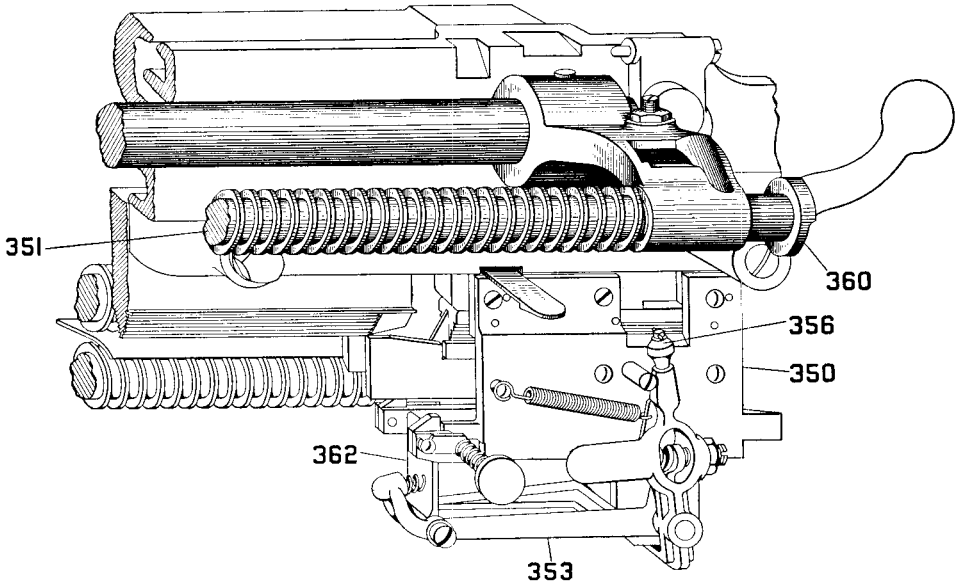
View showing the old-style single distributor with the distributor screw thrown out so as to remove matrices from the bar.
